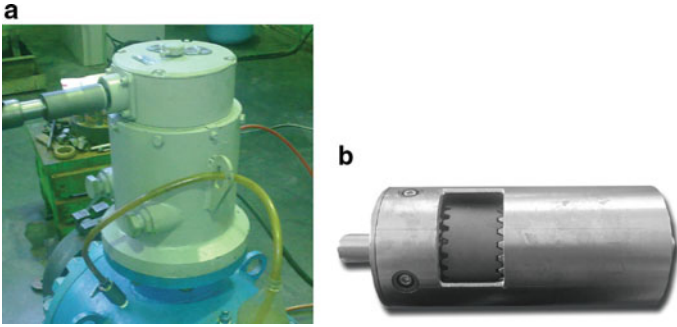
a, b Ball valve DN 300 and screw pump gearboxes based on a bevel precessional gear with a small shaft angle
